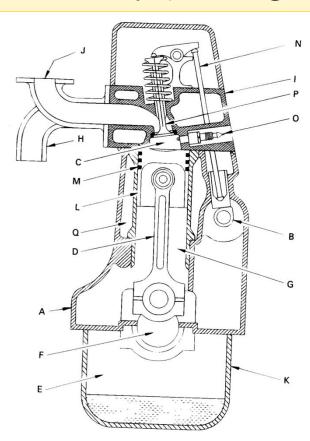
Cross-section of four-stroke cycle S1 engine showing engine components; (A) block, (B) camshaft, (C) combustion chamber, (D) connecting rod, (E) crankcase, (F) crankshaft, (G) cylinder, (H) exhaust manifold, (I) head, (J) intake manifold, (K) oil pan, (L) piston, (M) piston rings, (N) push rod, (0) spark plug, (P) valve. (Q) water tacket.
